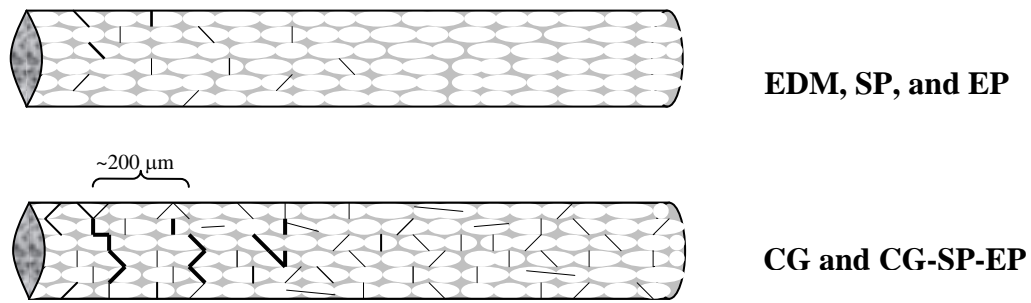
Drop Tower Specimen Tensile Surface Representations with Fracture Surface at Left (Tensile Stress Orientation \leftrightarrow)
